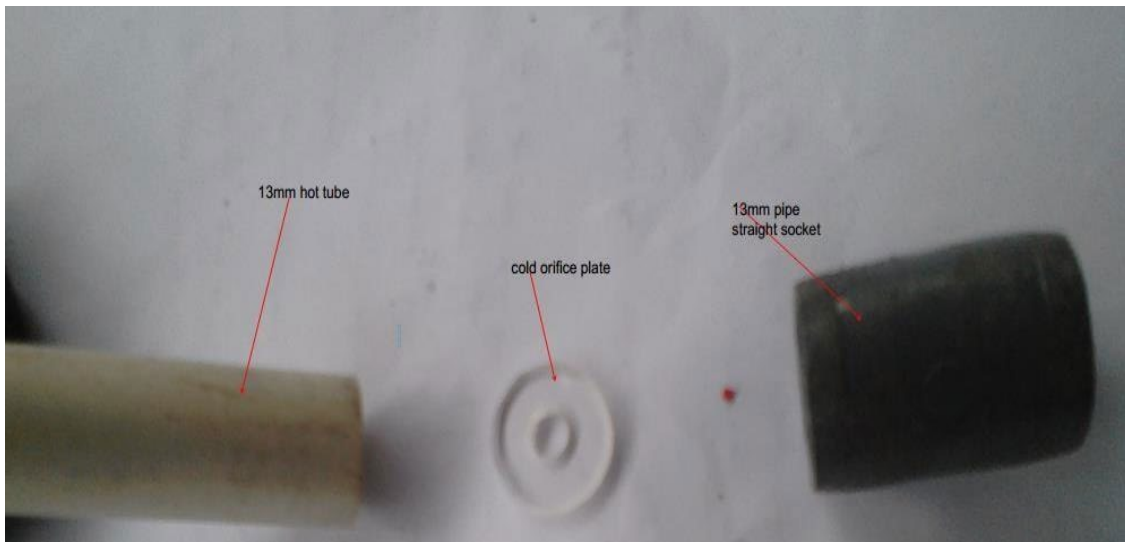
The Hot Tube, Socket and Orifice Plate are fabricated to form the Vortex Generator by drilling through tangentially
